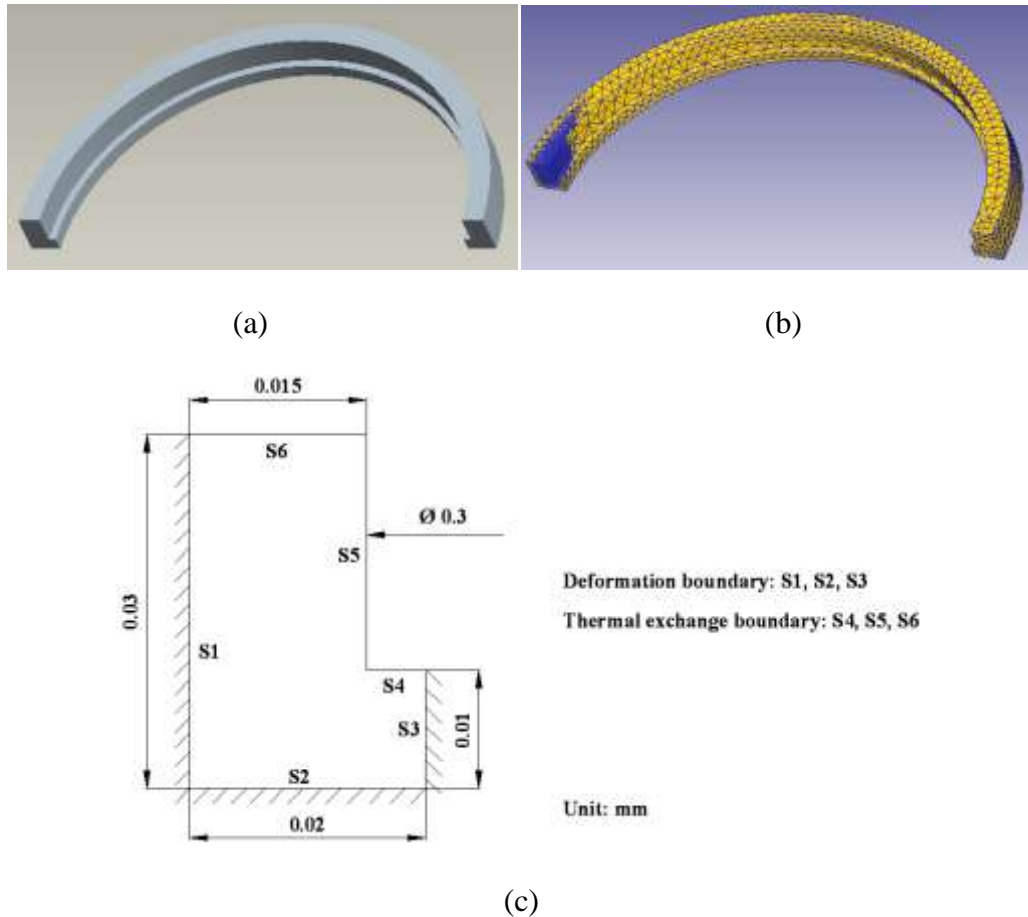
Workpiece modelling, meshing, cross-sectional dimensions and boundary conditions
